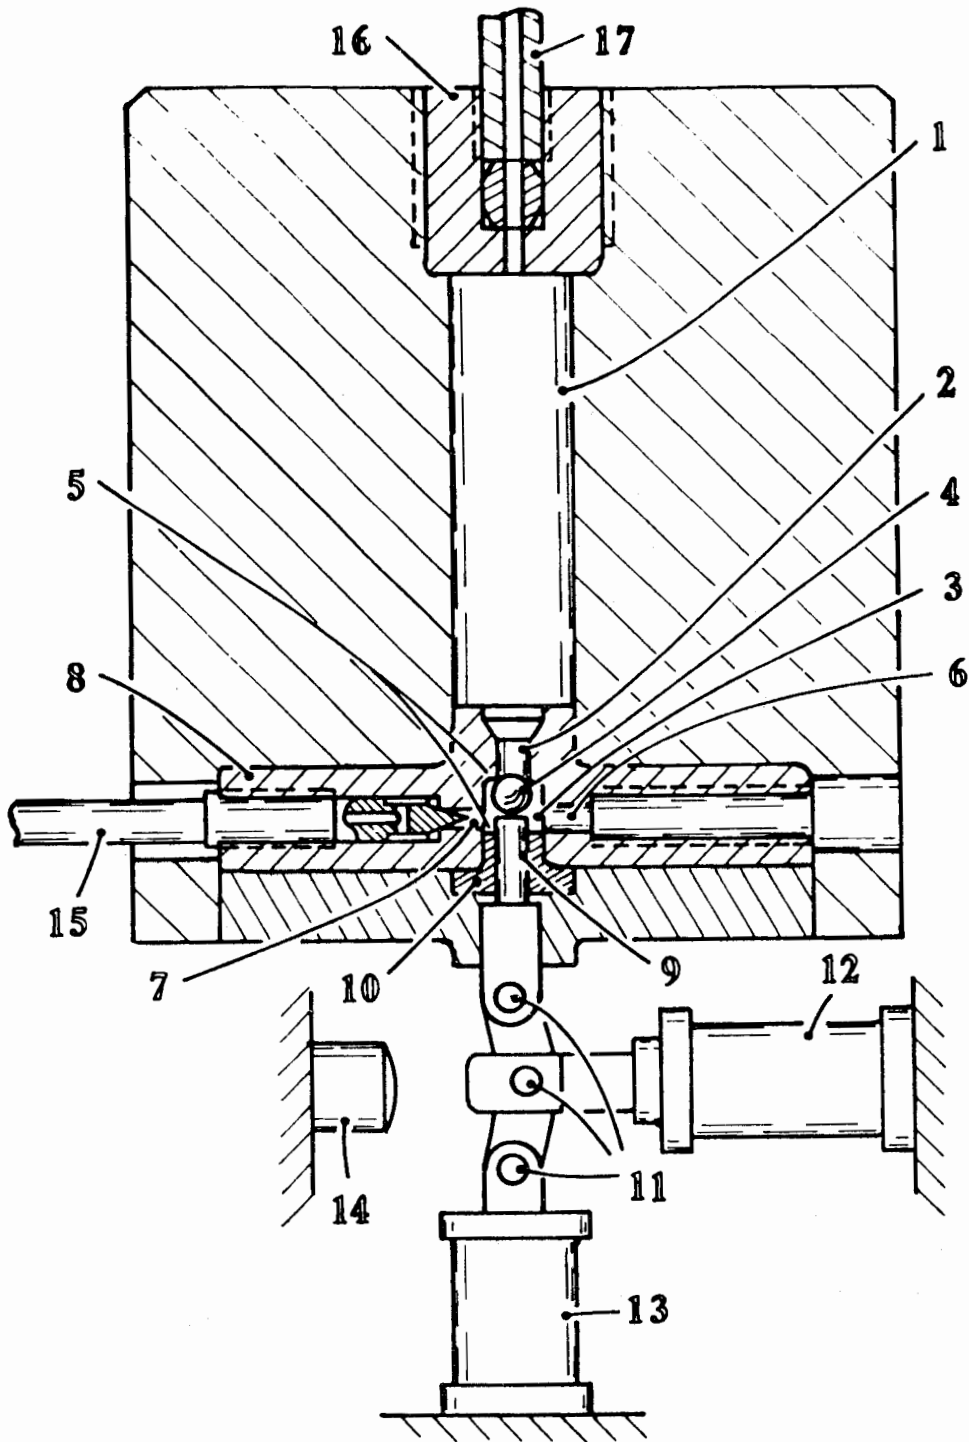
Engineering Schematic of 150,000 psi Positive Step Pressure Calibrator
